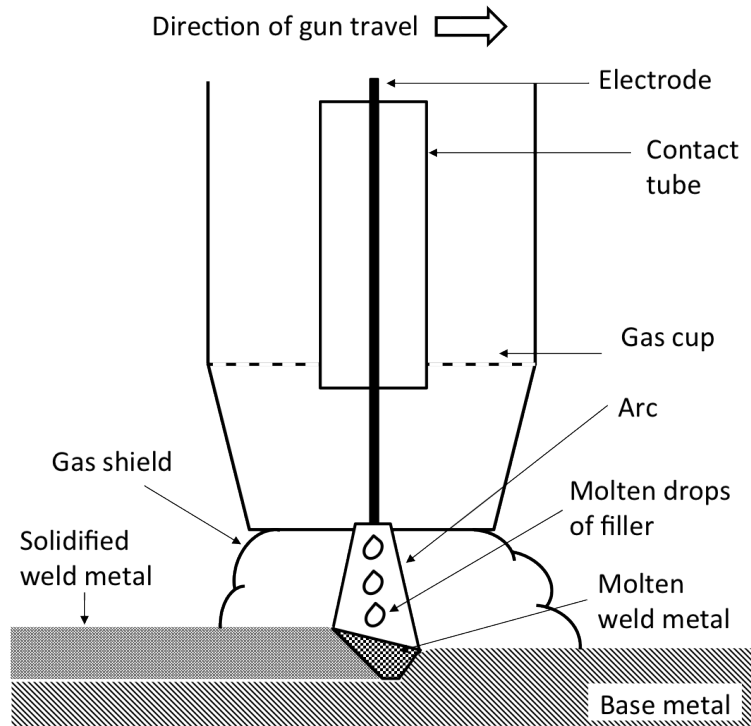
Gas-metal arc welding. The shielding gas protects the molten weld metal, which is produced from the consumable electrode [24].
